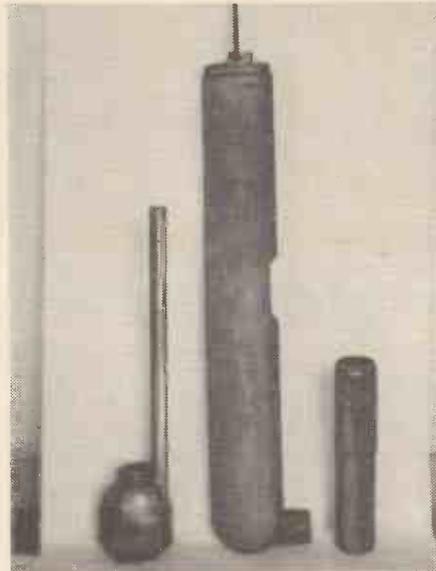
The silencer with the end removed and baffle withdrawn.
